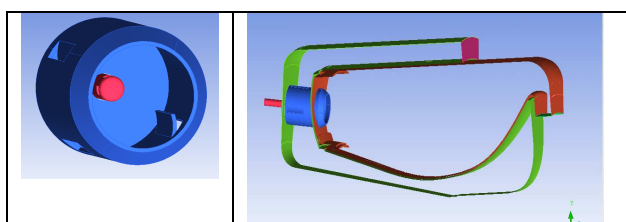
Isolated assembly of the air and fuel injector and in the sector that will be analyzed, pre-mixture (natural gas)
